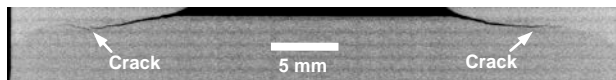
A re-sliced axial CT image of the weld sample #2 shown in Fig. 6a.
